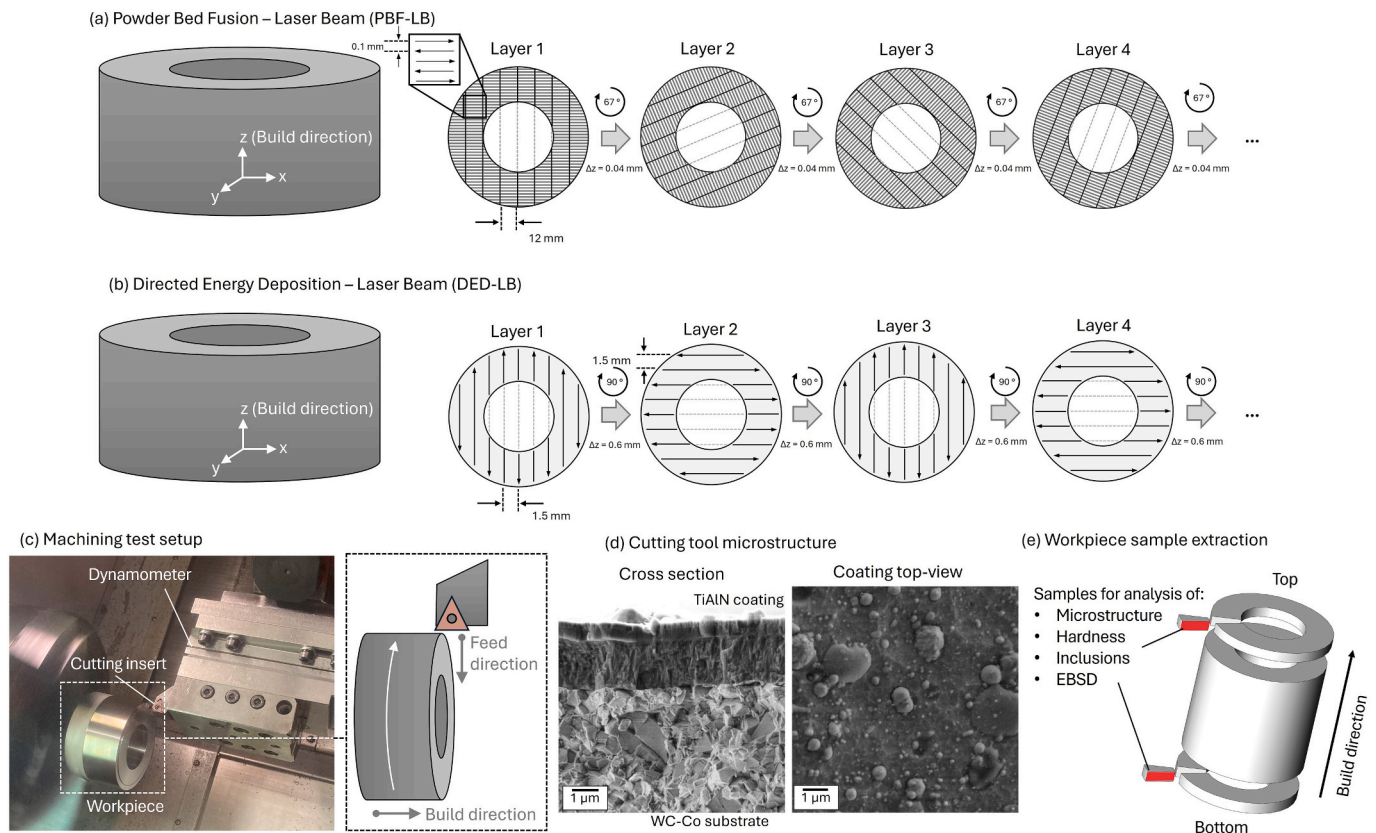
Experimental details of workpiece fabrication via AM (a, b), machining tests with dynamometer and feed/build direction relationship (c), cutting tool microstructure (d), and locations of metallographic sample extraction from workpiece (e).
